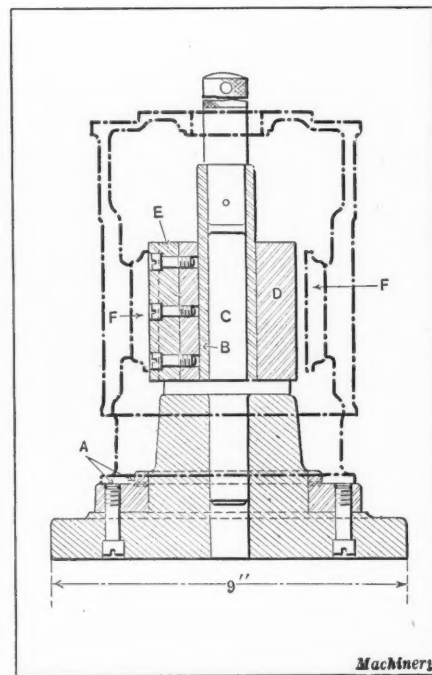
Gage for inspecting Concentricity of Pole Pieces after Assembly
